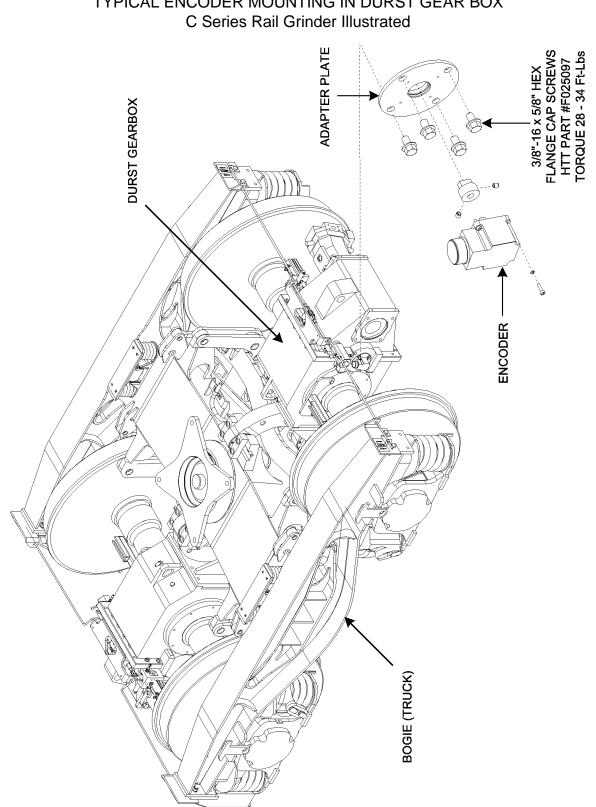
TYPICAL ENCODER MOUNTING IN DURST GEAR BOX
